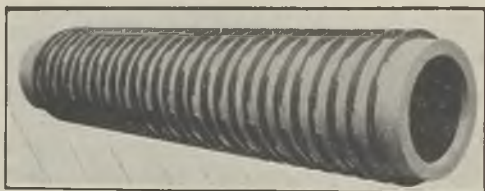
VENTILATED ROLLER CASTING, 24 IN. × 120 IN.
